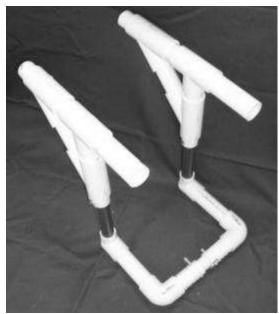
Assembly of the Medium/Large Wheelchair (Step 19).
